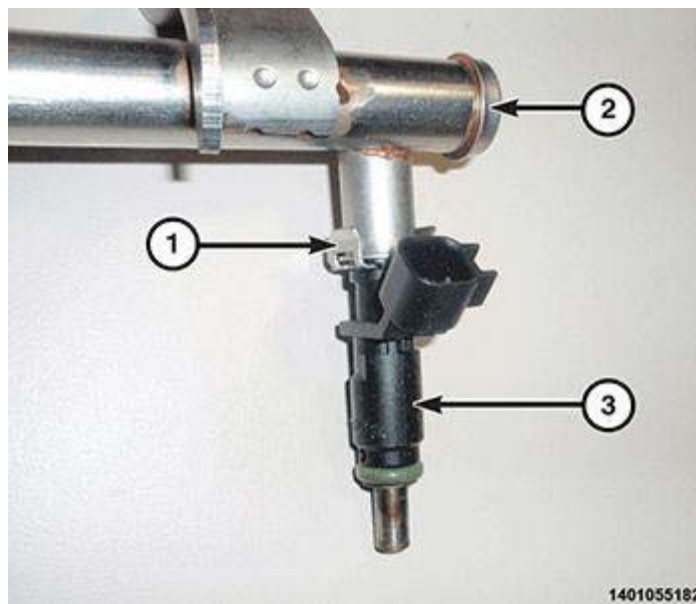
Safety Clips, Fuel Rail & Fuel Injector
